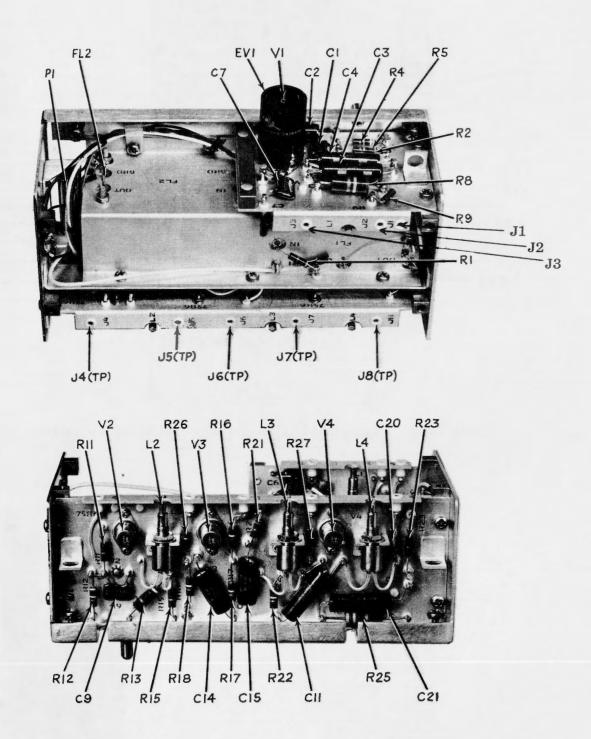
1st Injector A1A10, Parts Location and Test Points
